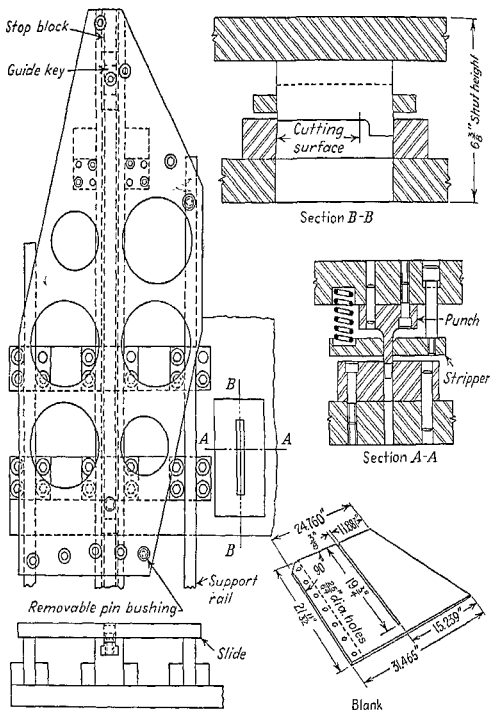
Die for cutting eight different-length slots in a single setup. Large holes in slide reduce weight.⁴
